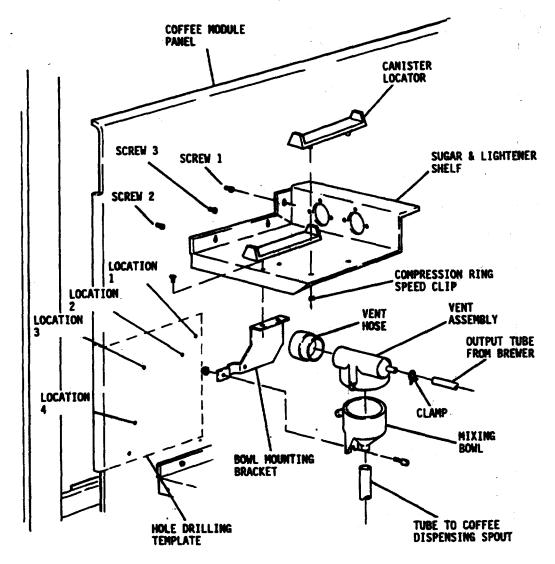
Assembly of New Sugar & Lightener Shelf
